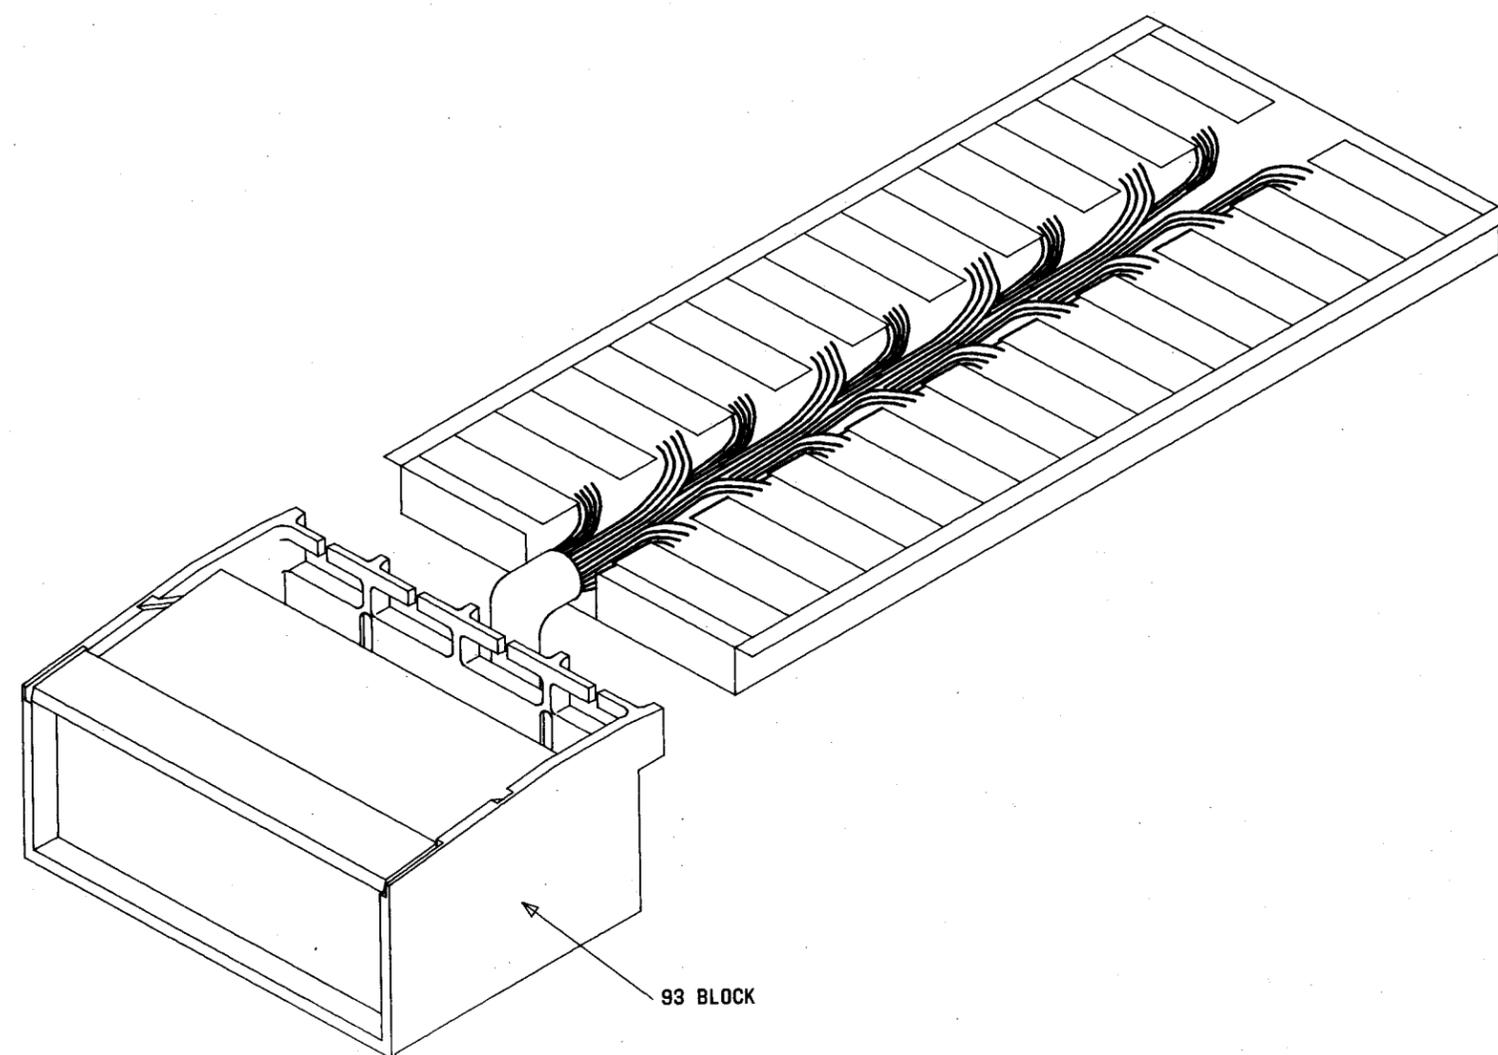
Multiport Bridging and Conference Call Connecting Block (Showing Bridging Components in Tray and Cabled to Block Assembly)
